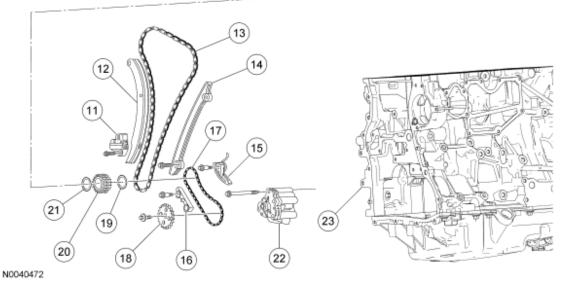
Exploded View Of Front Engine Block Courtesy of FORD MOTOR CO.
